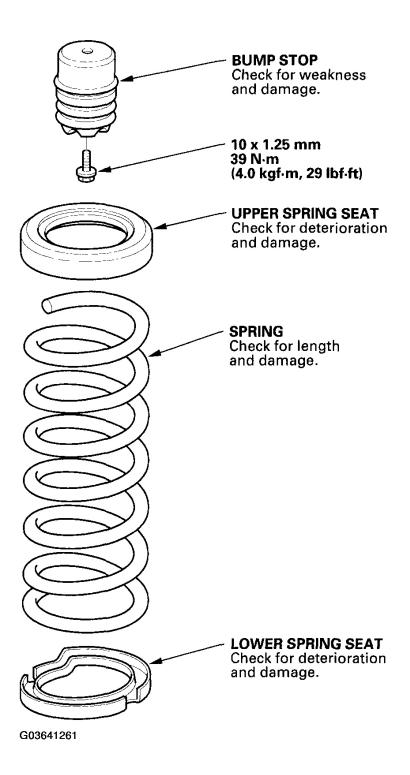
Exploded View Of Spring/Bump Courtesy of AMERICAN HONDA MOTOR CO., INC.
